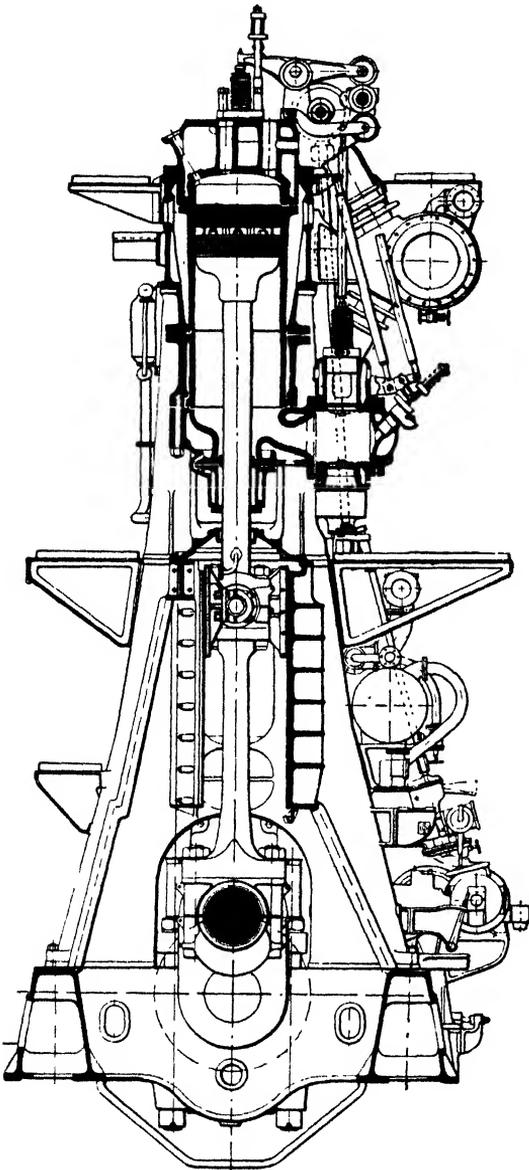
Sectional End Elevation through one Cylinder of the "North-Eastern" Double-acting Four-stroke Diesel Engine
